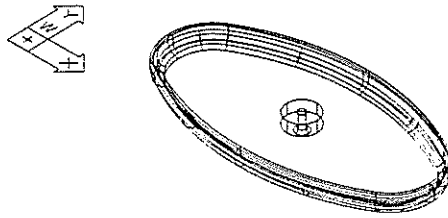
C'Bore hole changed to C'Sink hole, solid part updated
